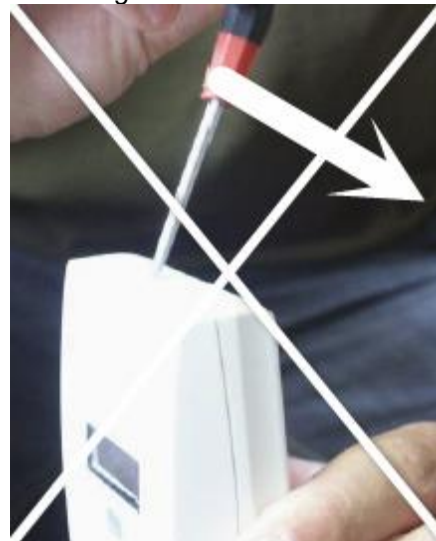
Closed housing seen from the side. Never push to the right. The locking hooks may break and the housing is damaged
